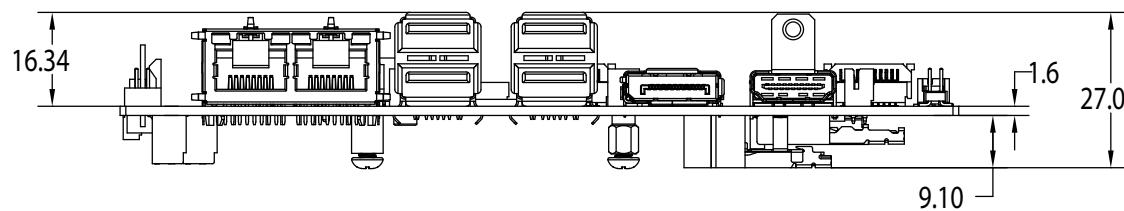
X11SWN Back Panel I/O Mechanical Layout
